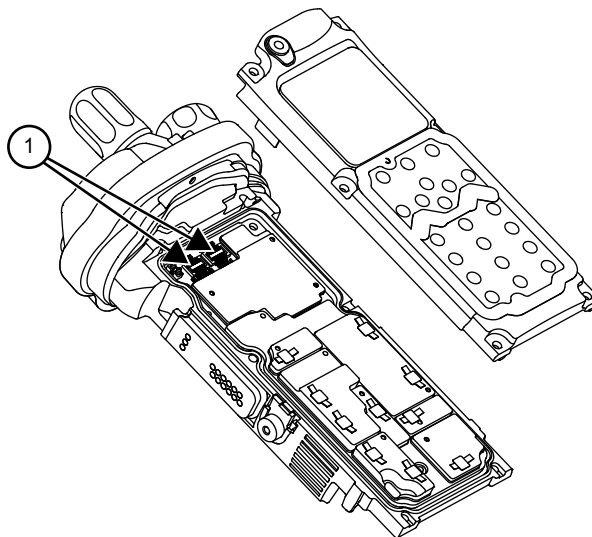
Remove Back Chassis Assembly from Main Chassis Assembly - APX 8000XE
